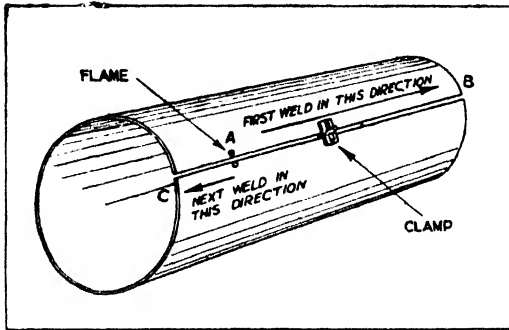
WELDING A LONG SEAM IN COPPER
